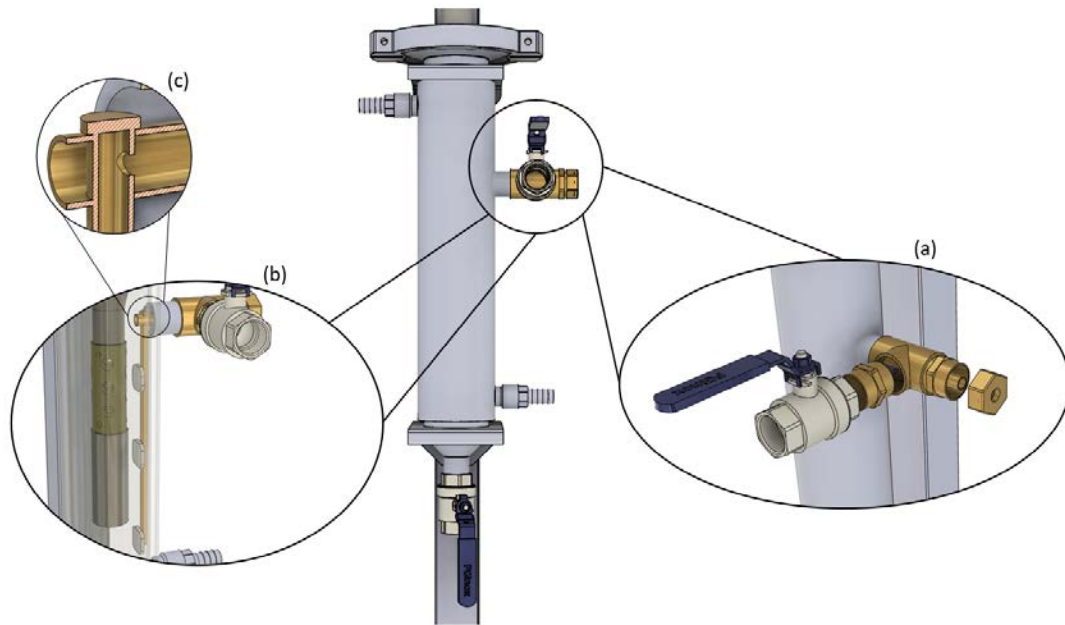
Design Concept A employs two tubes for wire passage: (a) with a dual entry at the top for chamber access, and (b) a perpendicular tube for wire passage to the piezoelectric sensors. (c) A detailed view emphasizes the connection between the tubes, highlighting the wire passage hole and the superior plate securing the second tube.
